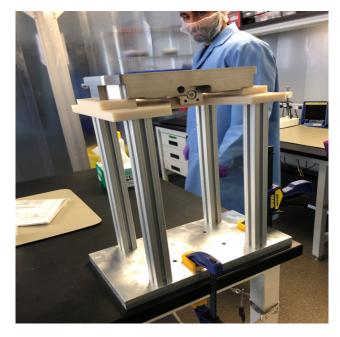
AITP-01 MGSE stand showing the machined common stand and the AITP-specific 3D printed fixture interfacing to the pathfinder tank bottom
